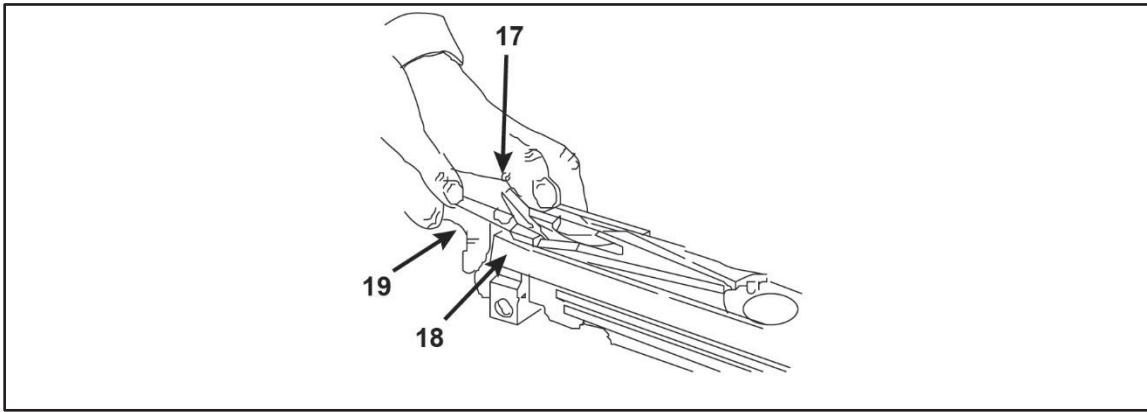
Removal of the cartridge extractor and bolt switch
